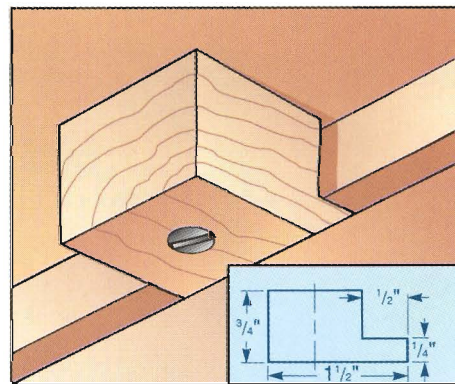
Equip your table saw with a 1/2" dado blade and a set-up block to cut two cabinetmaker's buttons for each side of the case.
